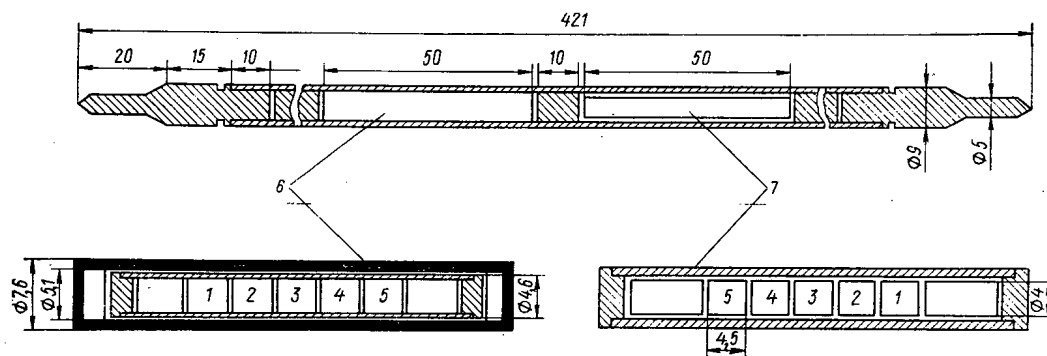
Sealed tube: 1-5) samples to be investigated; 6) capsules in cadmium shield; 7) aluminum capsules.
